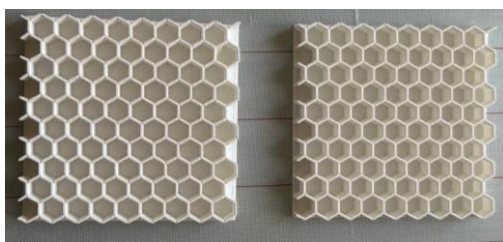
Samples of 3D-printed honeycomb PLA cores
